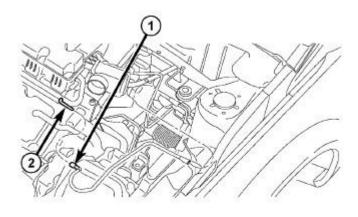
INTAKE RETAINER VIEW Courtesy of CHRYSLER LLC
